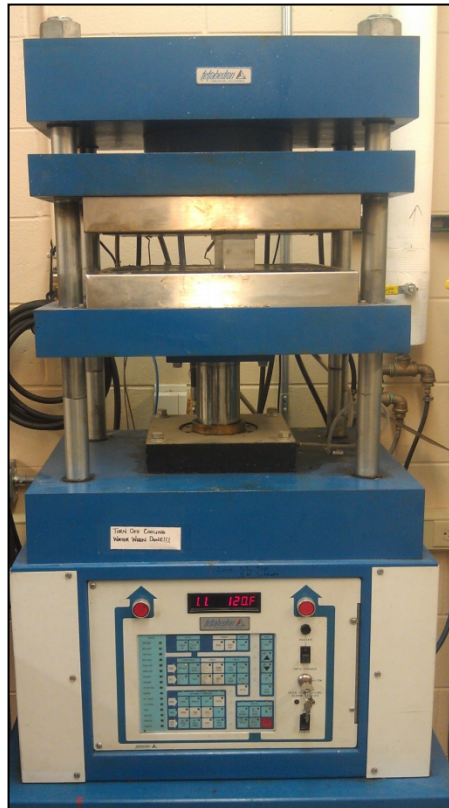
Image of the mold in the compression molder, which simultaneously heats and compresses the PLGA to form it into the desired shape
